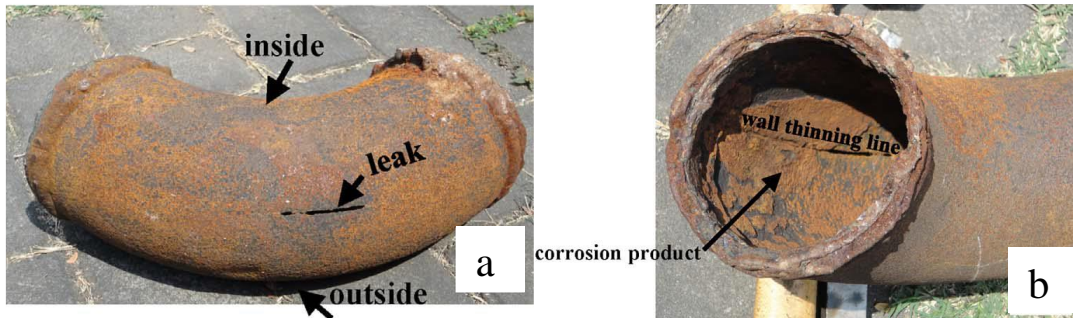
A view of failure location and wall loss on pipe elbow, (a) external crack and, (b) internal wall loss [19].
